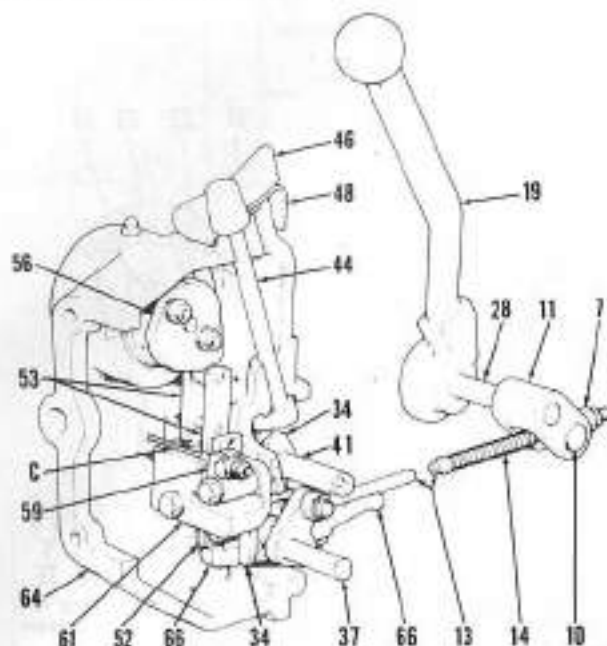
Assembly view of control lever and control mechanism. Refer to Figs. 204 and 205 for exploded view of control lever and mechanism.
